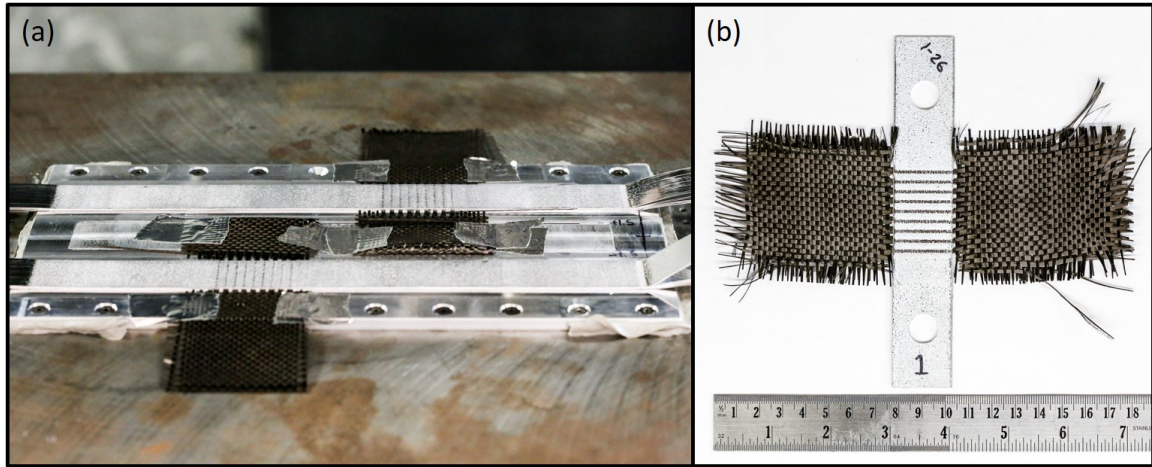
(a) Cross tensile specimens being manufacturing in UAM center. (b) One of the cross tensile joints after baseplate removal.
